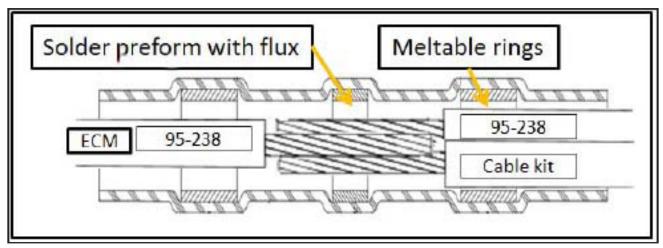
Install a Solder Sleeve for 5V OEM Sensor Supply Splicing
